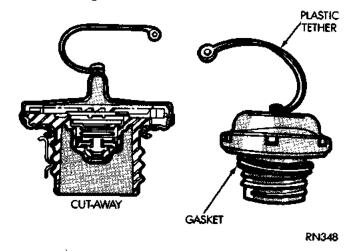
Fuel Tank Filler Tube Cap—Typical removed prior to disconnecting any fuel system component or before draining the fuel tank.
